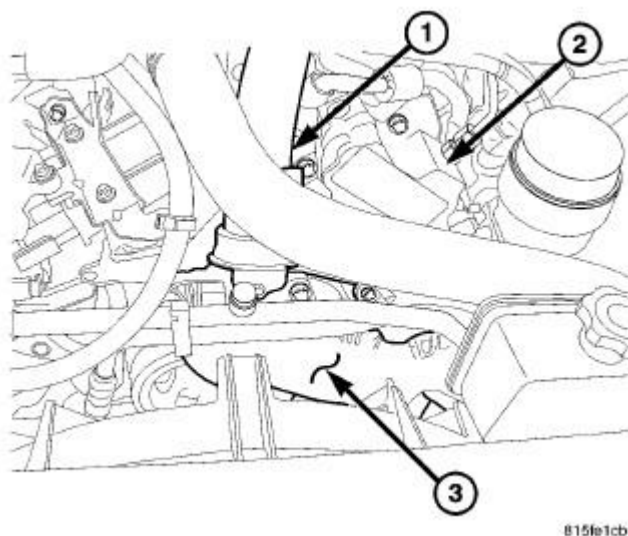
CHARGE AIR COOLER INLET WITH RESONATOR
